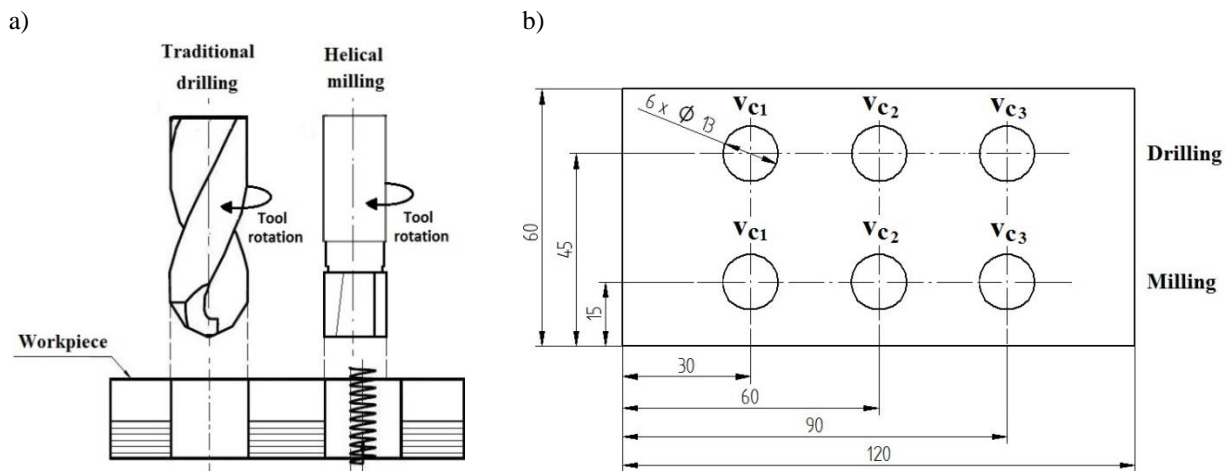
Experimental setup: a) scheme of traditional drilling and helical milling, b) location of the holes on the sample
